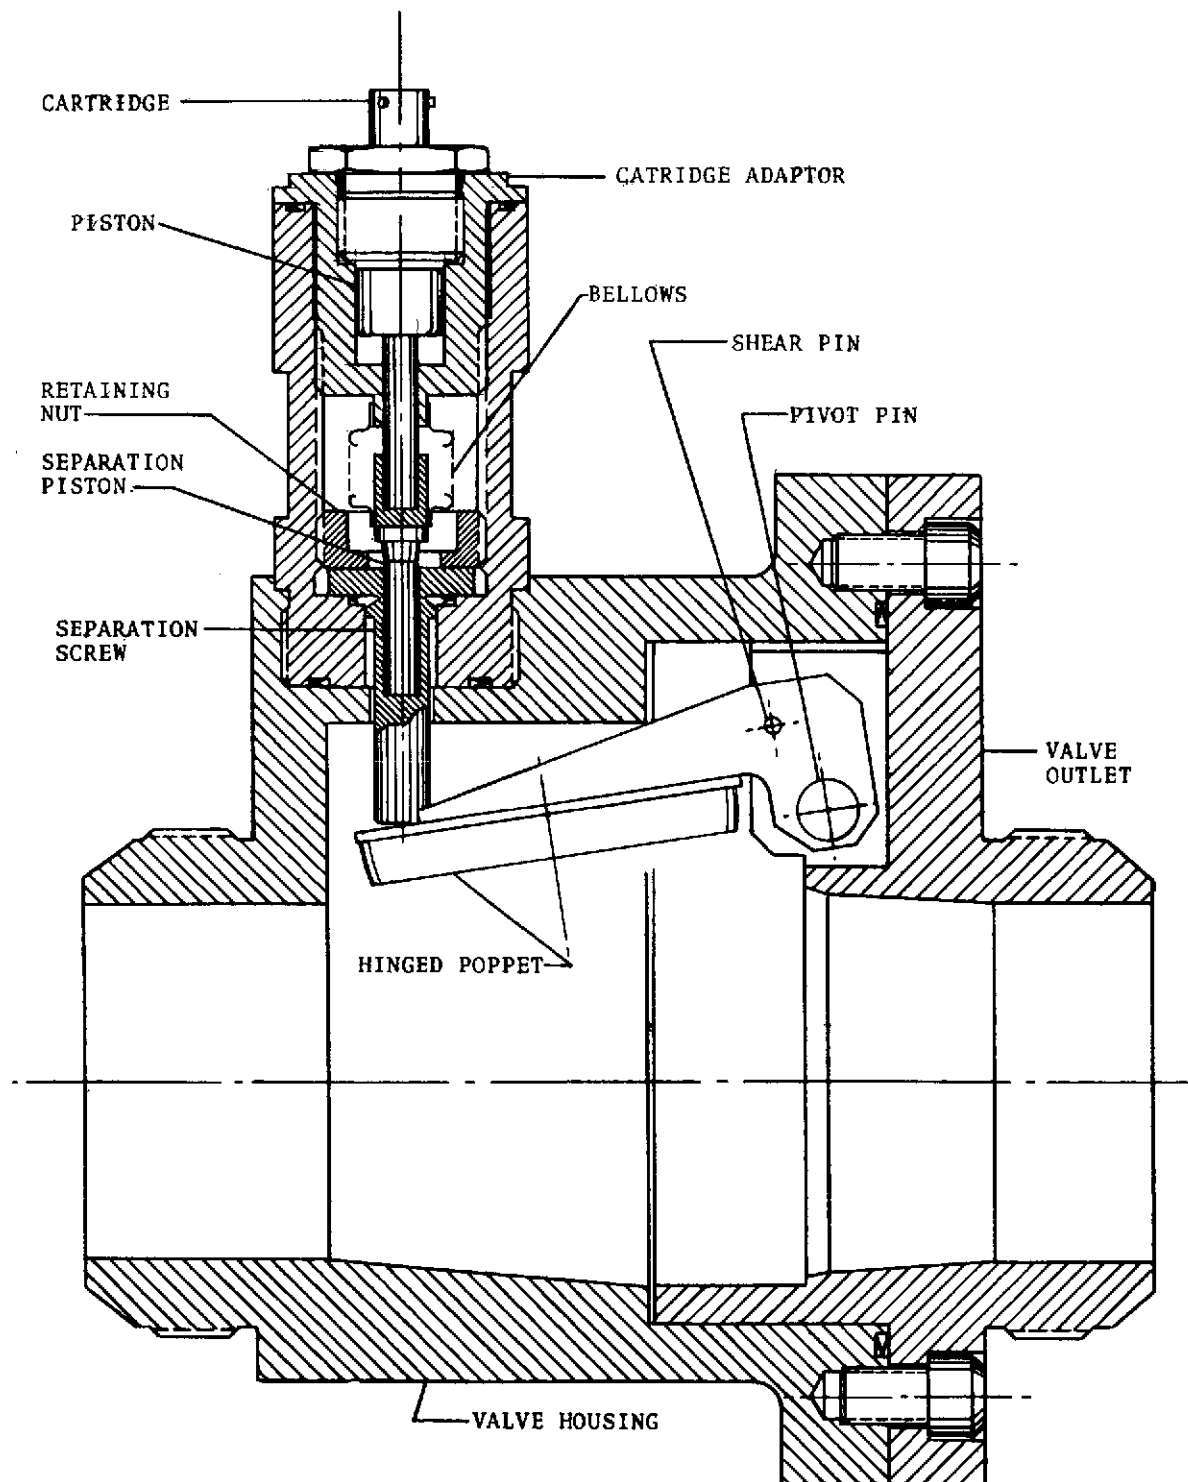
2-1/2 INCH, EXPLOSIVELY ACTUATED VALVE
